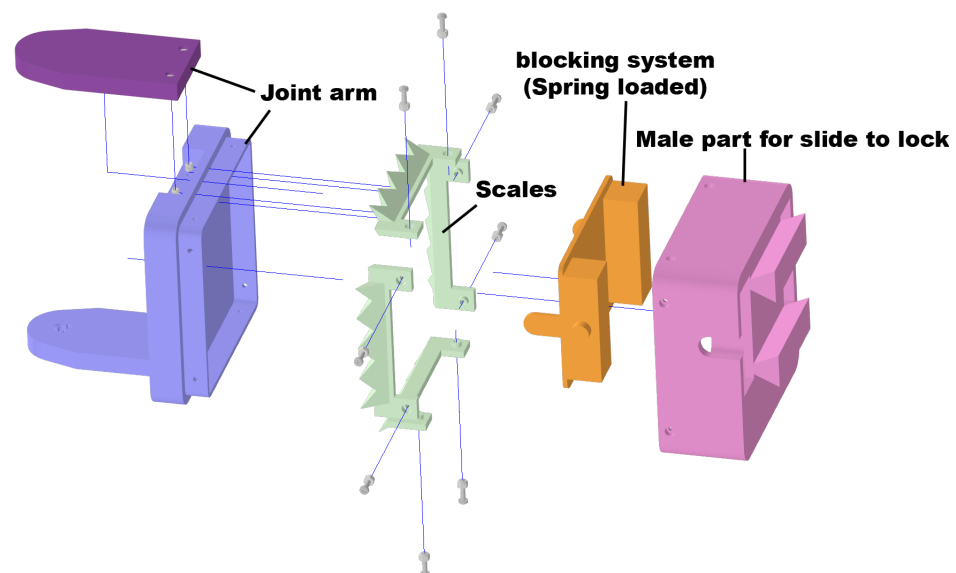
An exploded view of the coupling mechanism (slide-to-lock) and its components.
